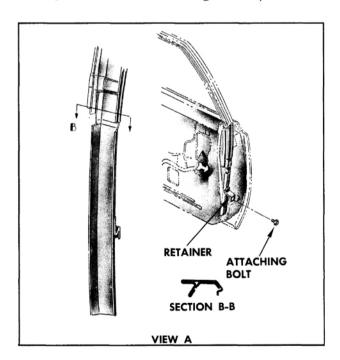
Glass Run Channel Lower Rear Retainer
